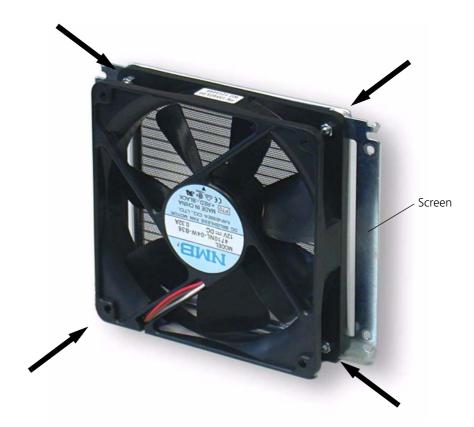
Removing the hexagonal-drive (Allen) screws securing the fan
